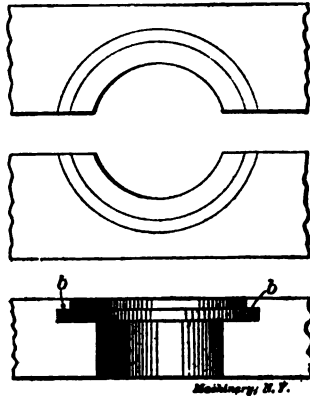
Arrangement of Vise Jaws to Hold Piece Shown in Fig. 6
